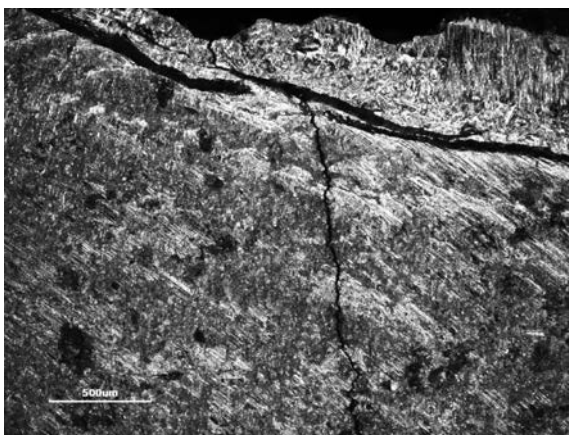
A crack initiated on the unreremoved burr after piercing the hole
